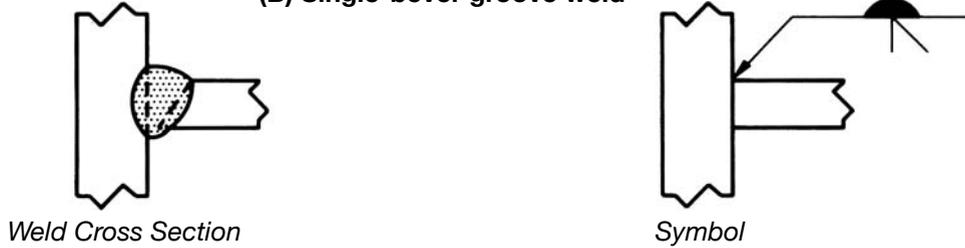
Weld Joint Designs (continued)
